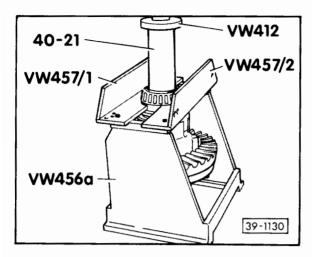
Pressing inner race/ tapered roller bearing off housing
